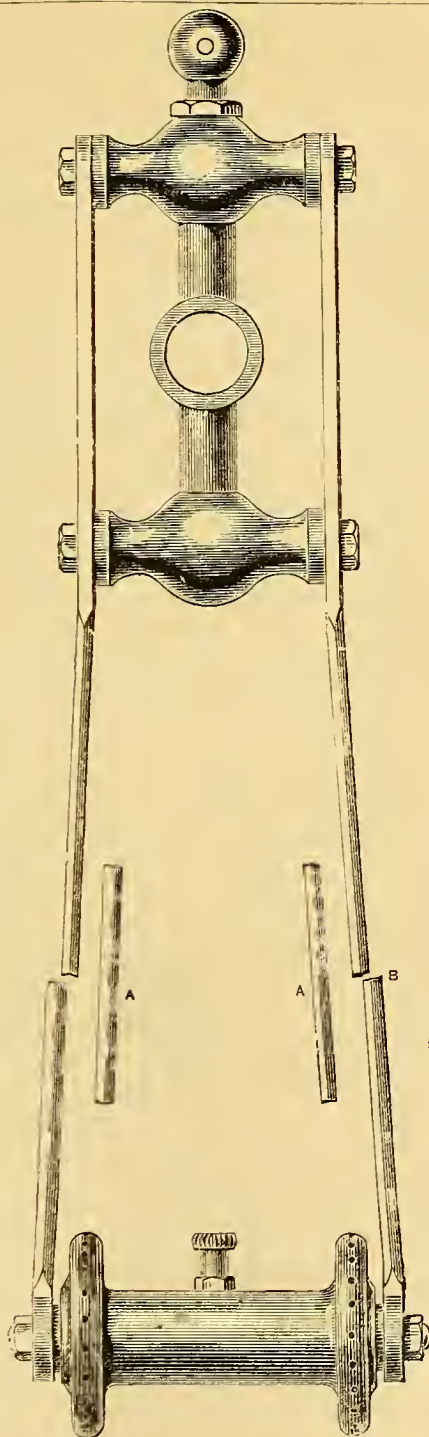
FORK PARTS FOR ONE WHEEL
